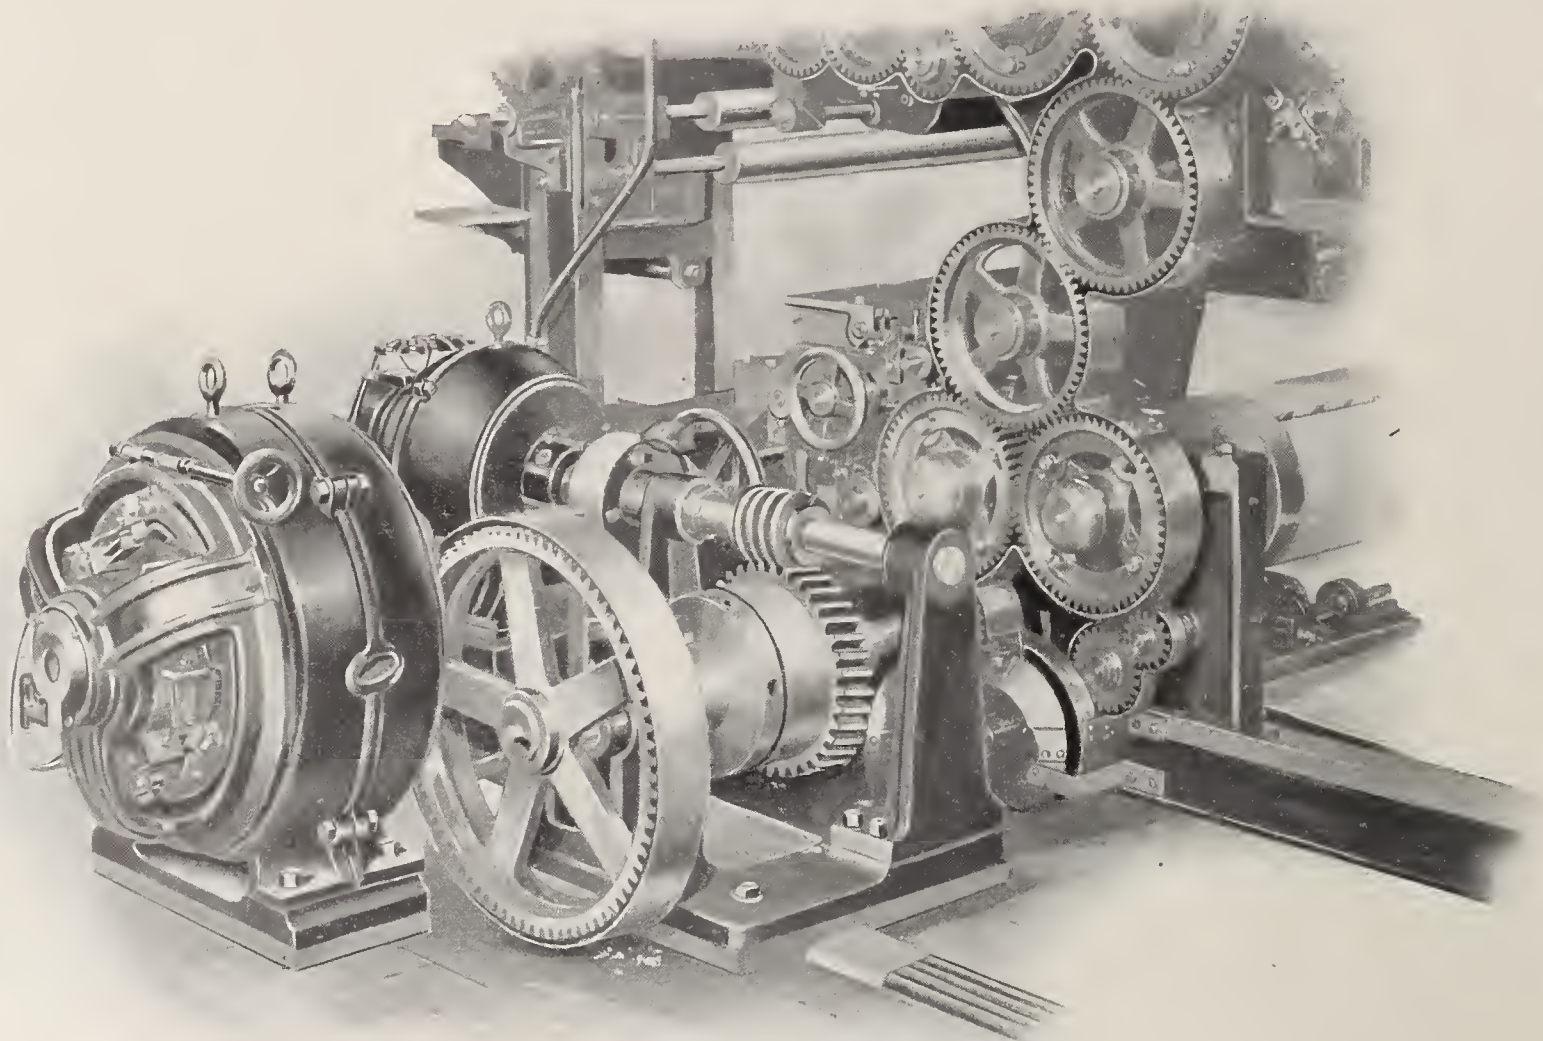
THE KOHLER CONTROL WITH SPRAGUE MOTORS, AS INSTALLED BY MESSRS. KOHLER BROTHERS, CHICAGO
